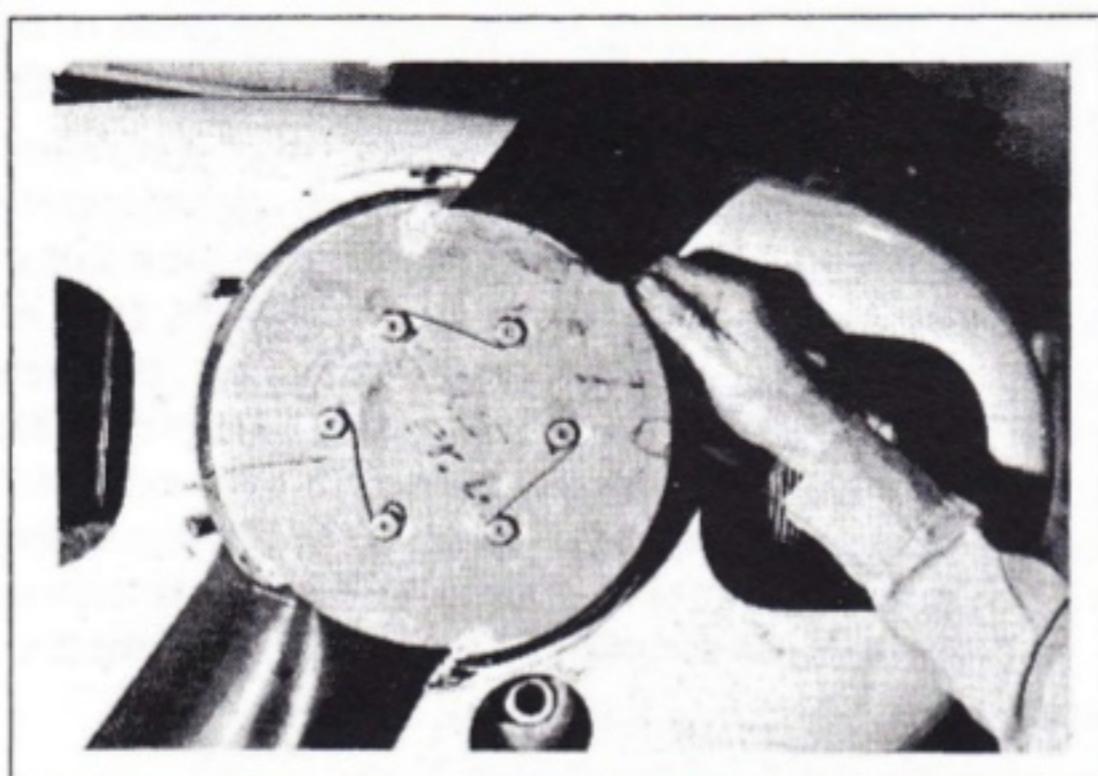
The propeller hub and assembly must be checked and properly safetied.
